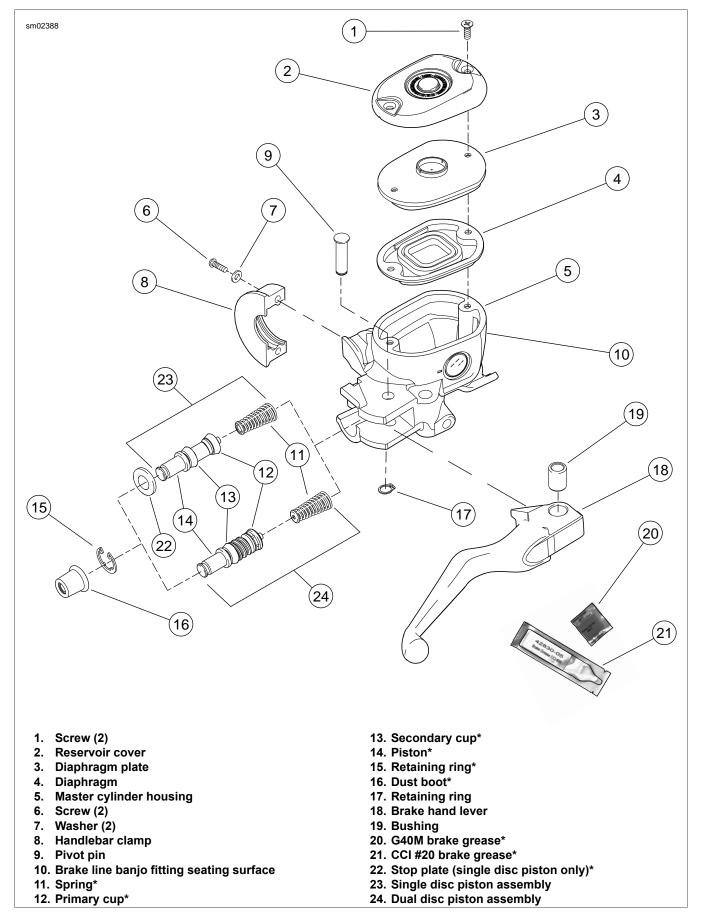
Front Brake Master Cylinder Assembly (\*Provided in Service Parts Kit)
